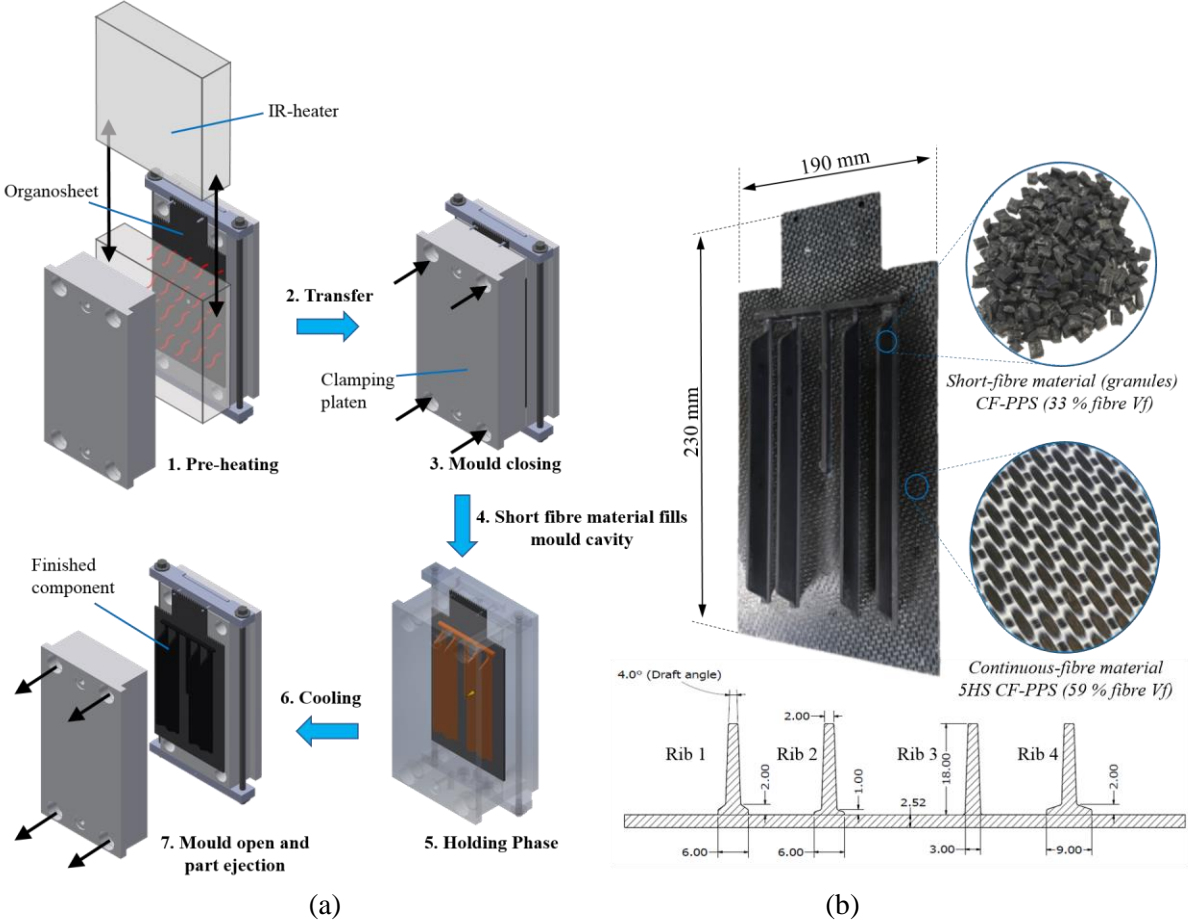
Overmoulding setup at TU Dresden for ribbed plate manufacture (a) and ribbed plate component dimensions
